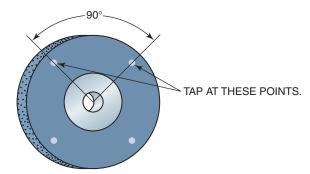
Grinding stones should be checked for cracks before they are installed.
